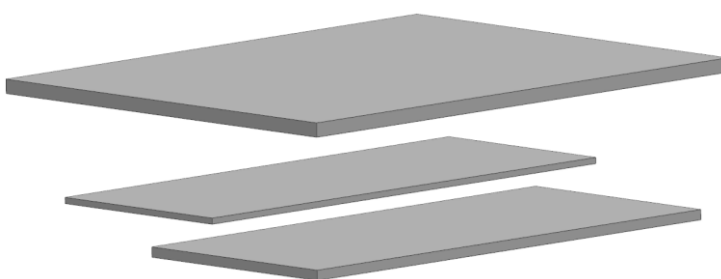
The 3D CAD model of the Platform Outline View – Concept (DG 7602-01) for a 7X82-2.0 engine
